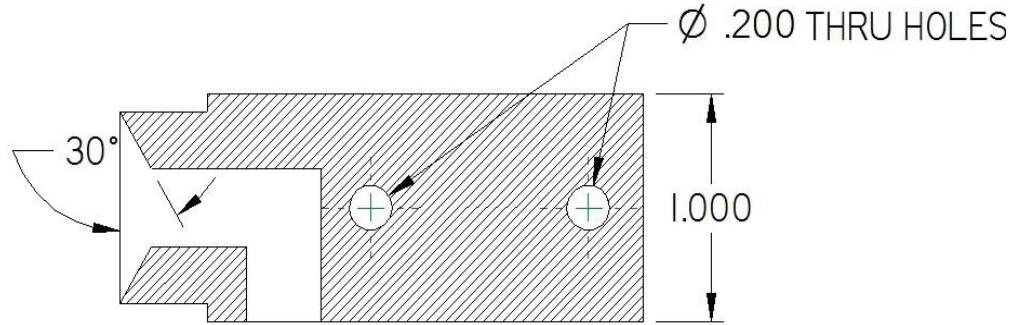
Regenerator end caps. the thru holes are for mounting the regenerator tubes to the tray.
